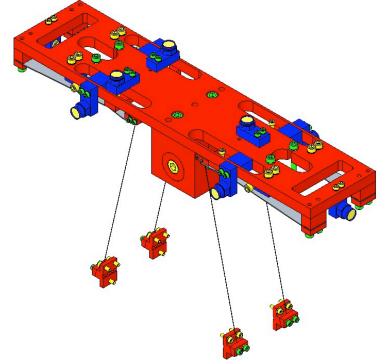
Upper Mass (Magnet Flags removed) with Lower Wires
